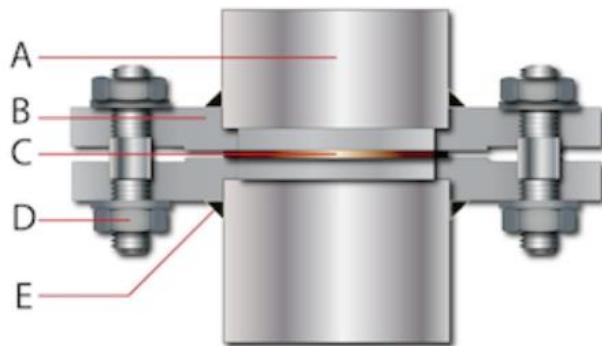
Pipe flange joint parts: A) Pipe, B) Flange, C) Gasket, D) Bolting and E) Weld. Image reproduced with permission from Tameson, source <https://storage.tameson.com/asset/Articles/general/pipe-flange-example.png> [47].
